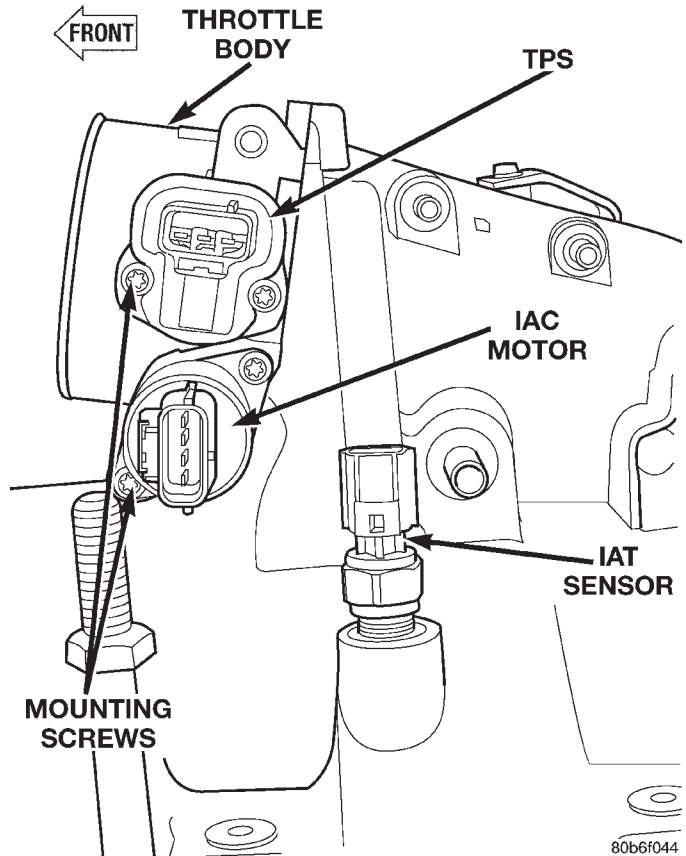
TPS Mounting Bolts—4.7L V-8 Engine
